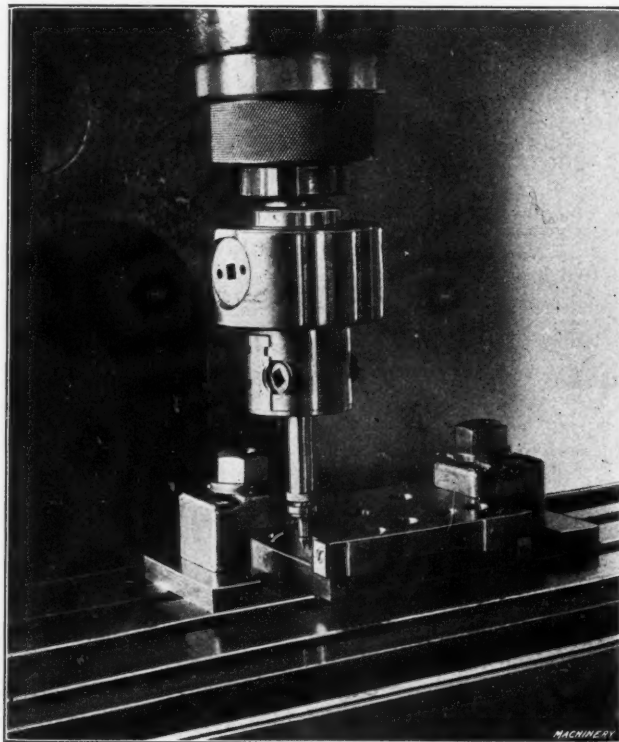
Marvin & Casler Center Indicator in Place on the Machine
